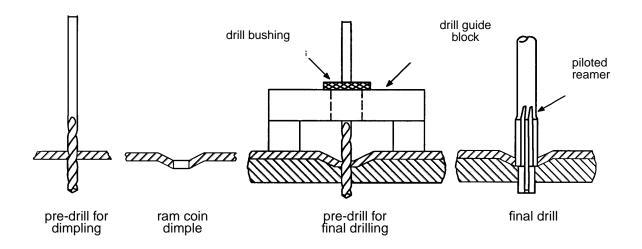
Hole Preparation for Flush Head Rivets (Dimpled Installation)
